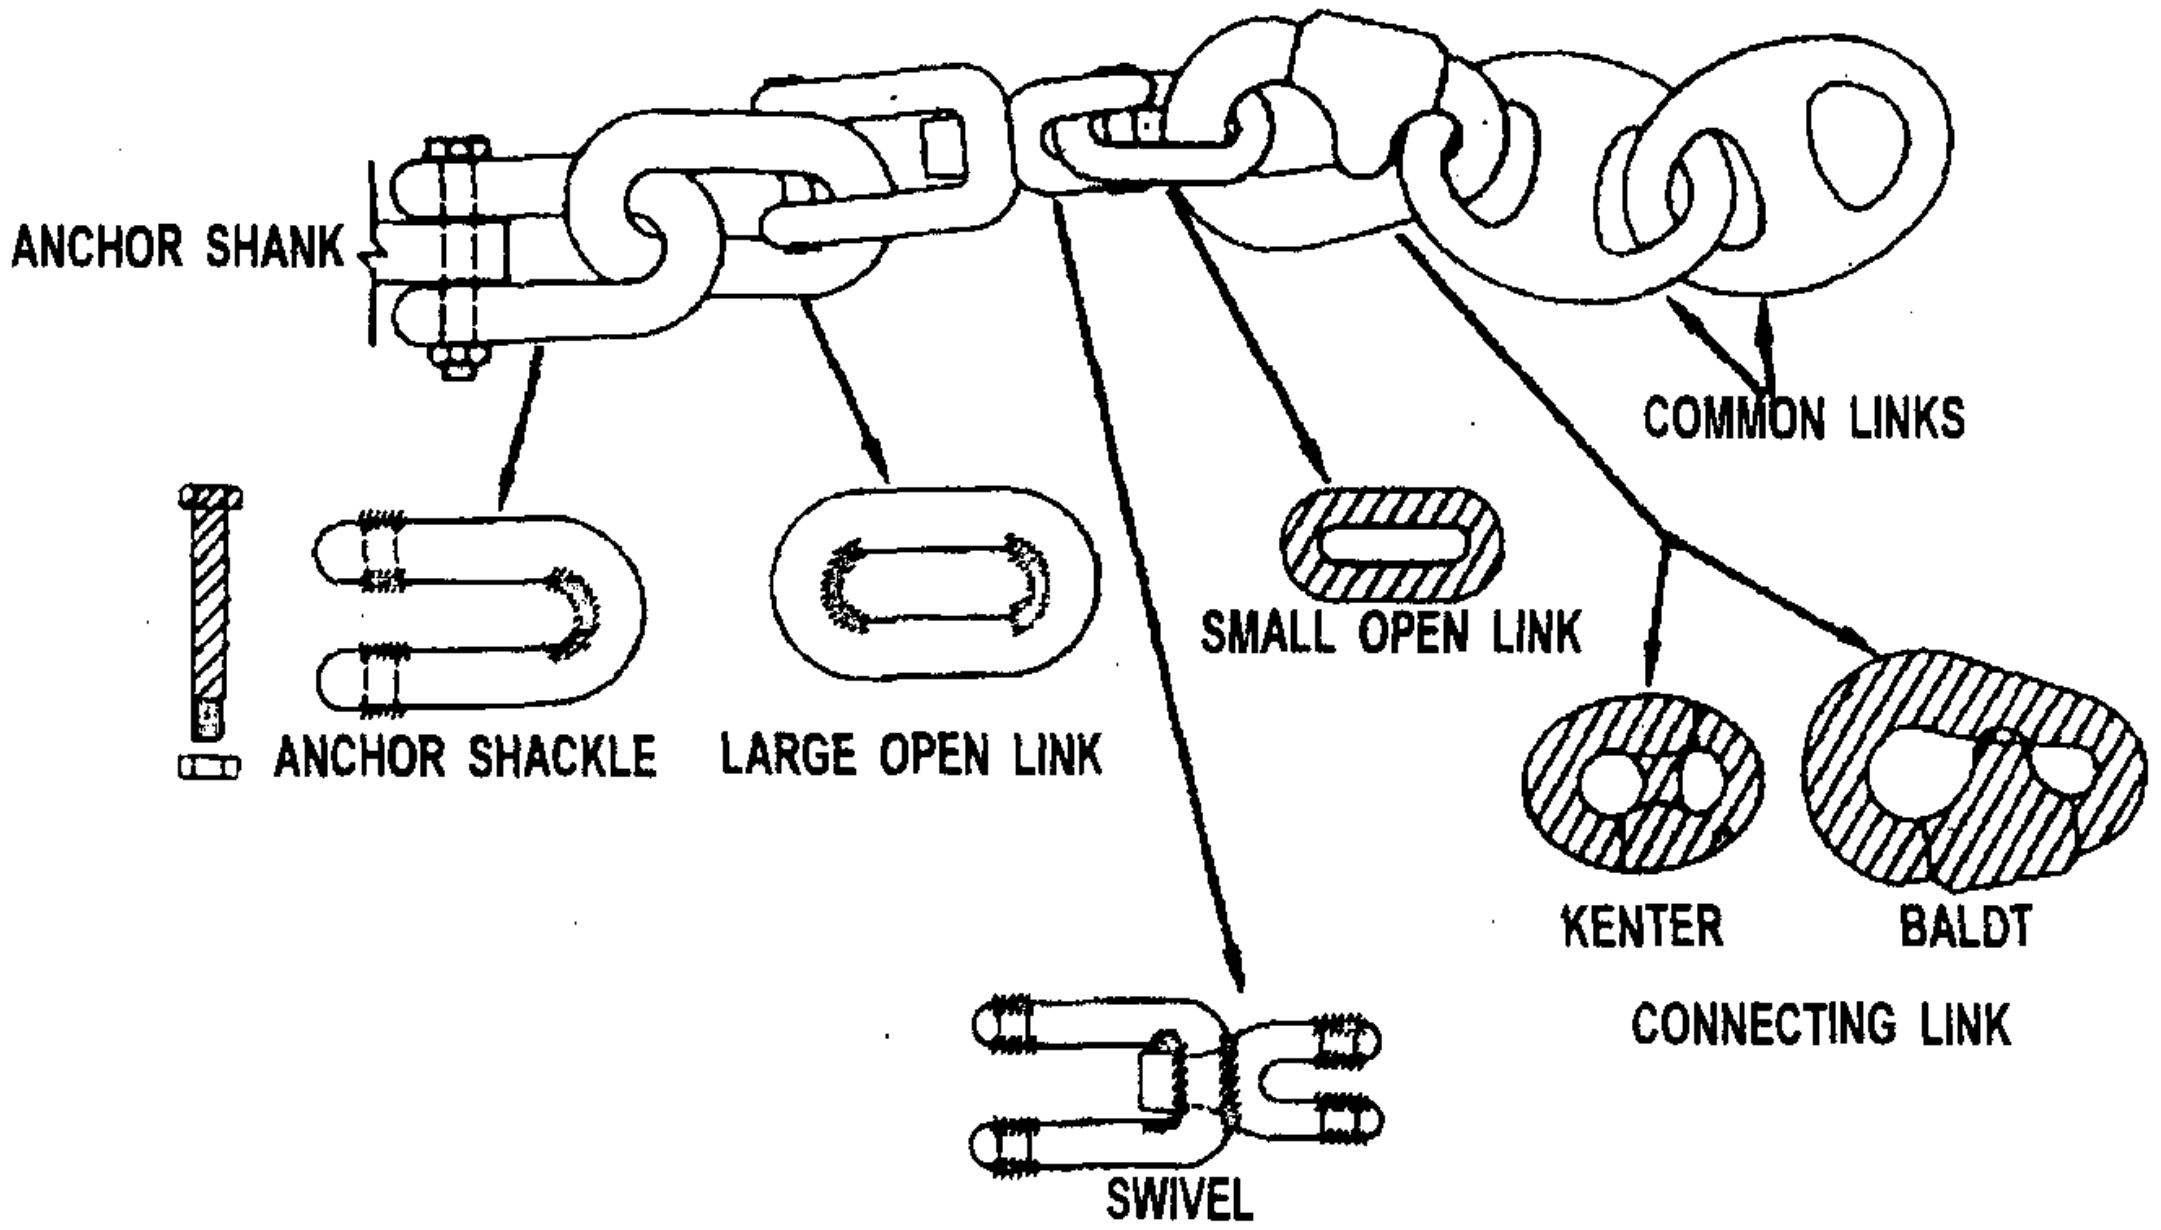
INSPECTION OF ANCHOR JEWELRY
